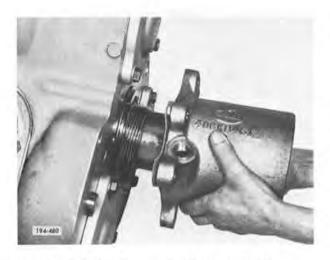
Removing Mainshaft Rear Bearing Cover
